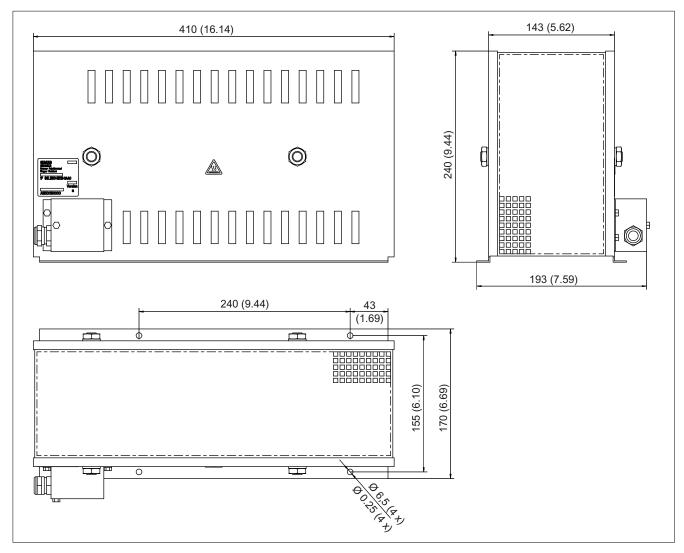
Dimension drawing of braking resistor 1.5 kW/100 kW, all dimensions in mm and (inches)
